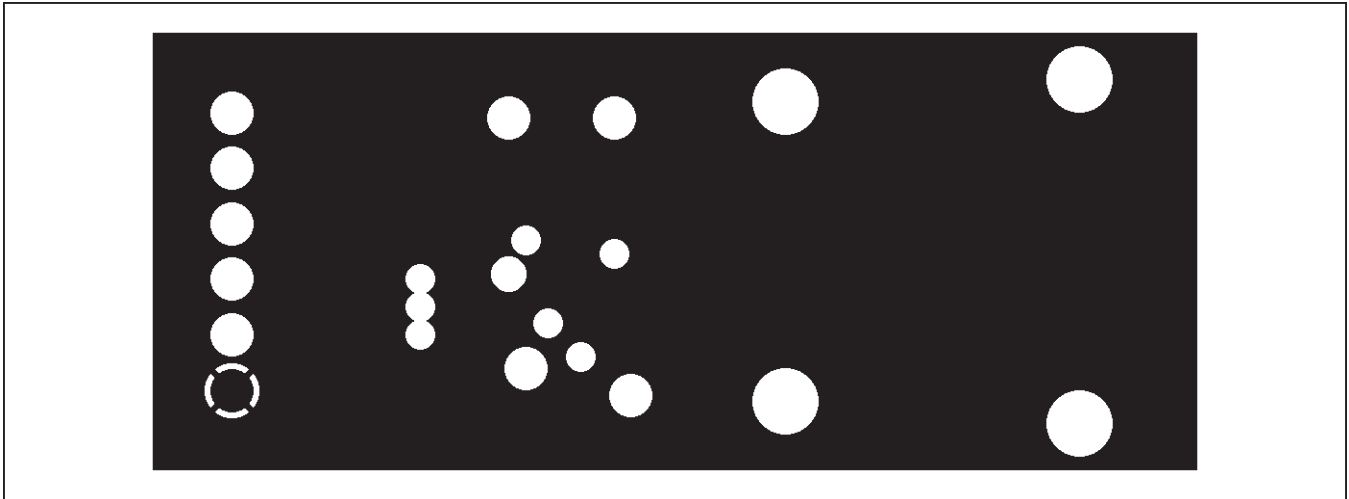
MAX31855PMB1 Peripheral Module PCB Layout—Inner Layer 2 (Power)
